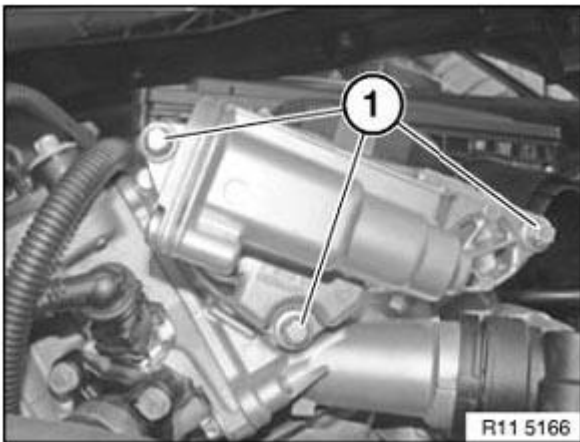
Identifying Bolts On Oil-Coolant Heat Exchanger
